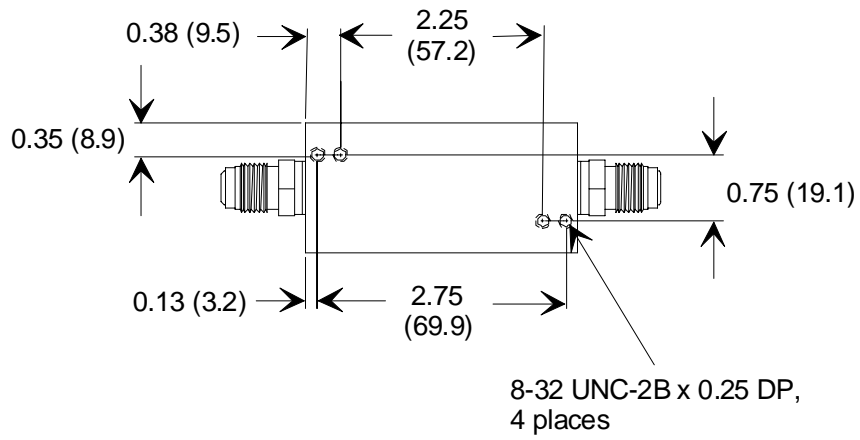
Mounting Dimensions of the 1479 Flow Controller
